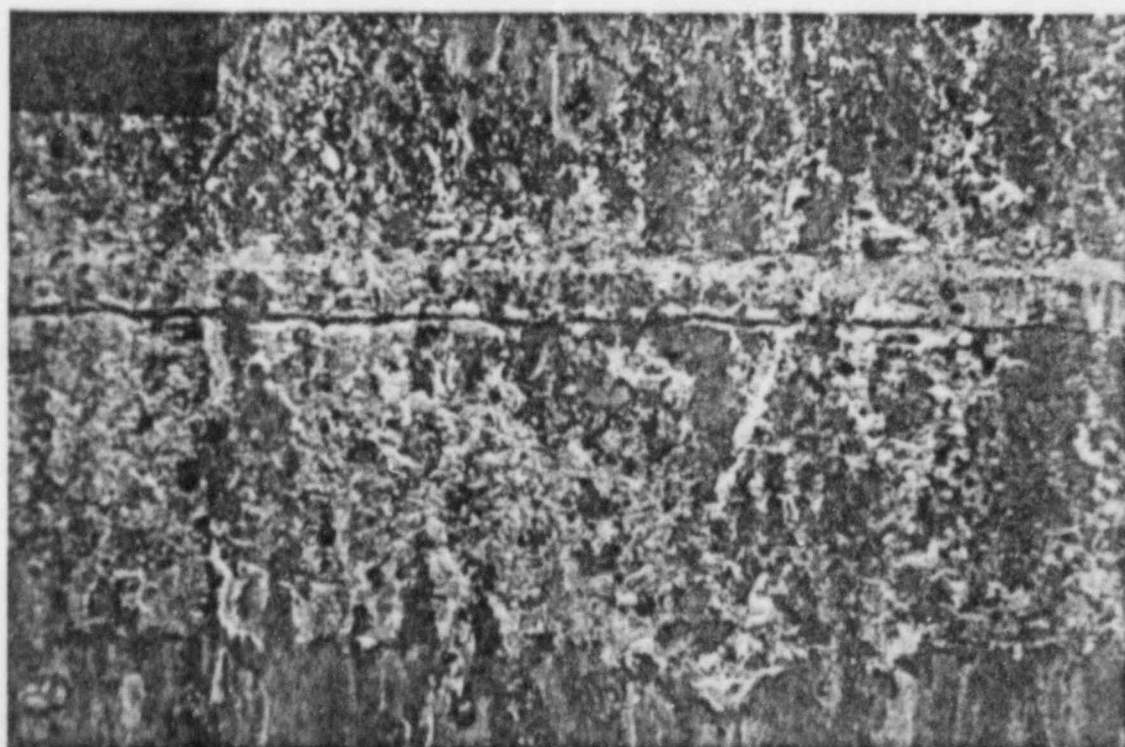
Tank 8D-2 Weldment Before Wire Brushing,
